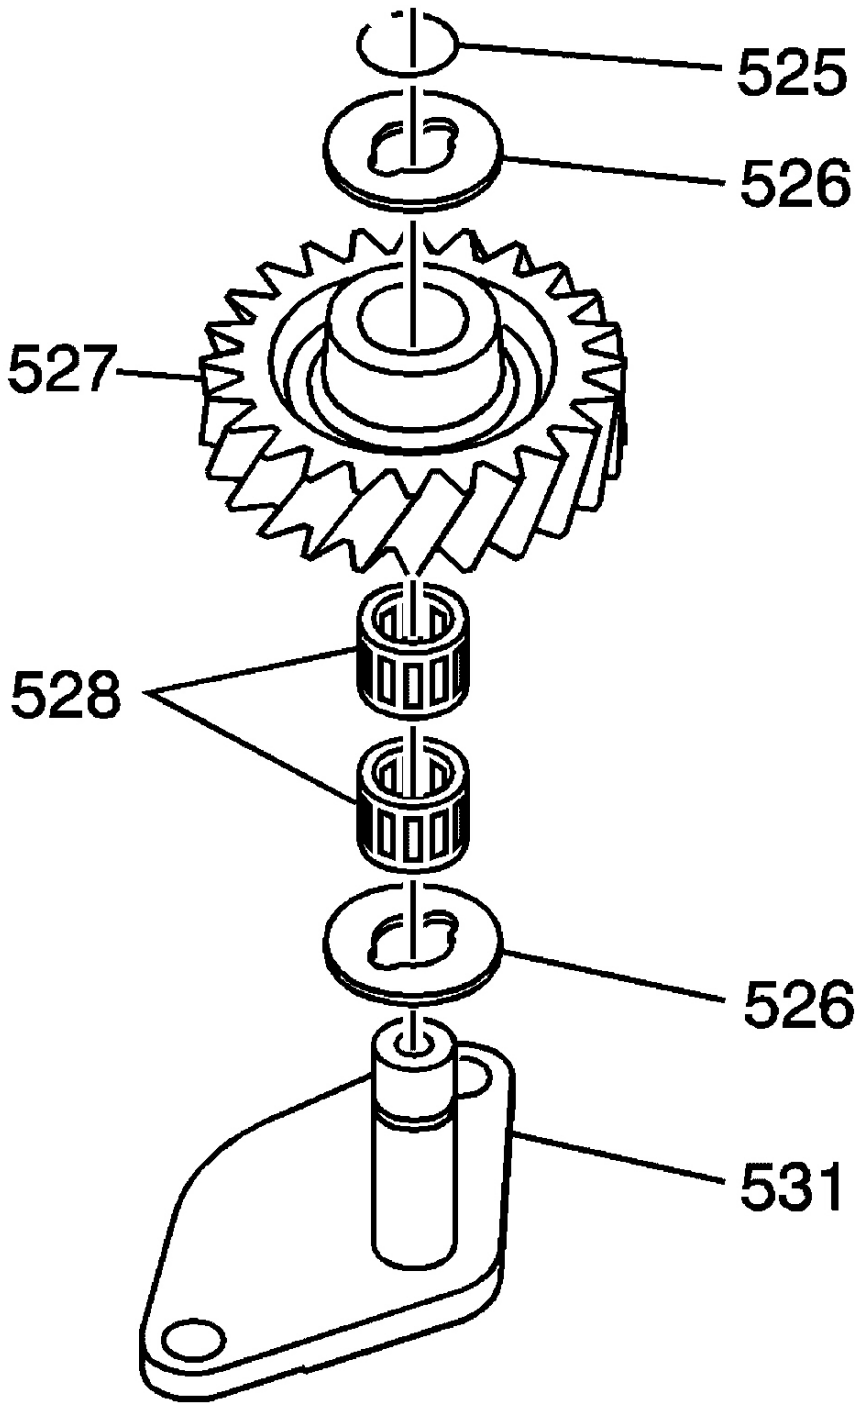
Removing Reverse Idler Gear Returning Plate Assembly
